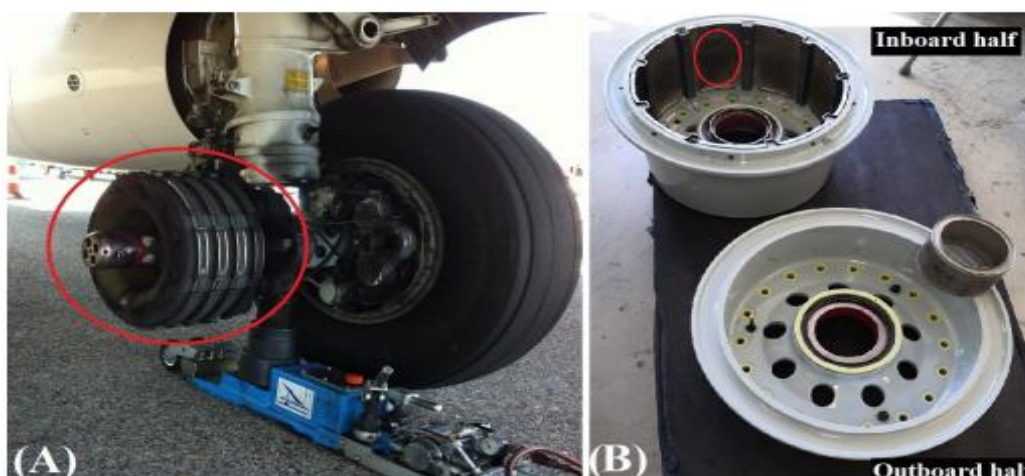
Stator part (A) and rotor part (B) of the aircraft wheel assembly
